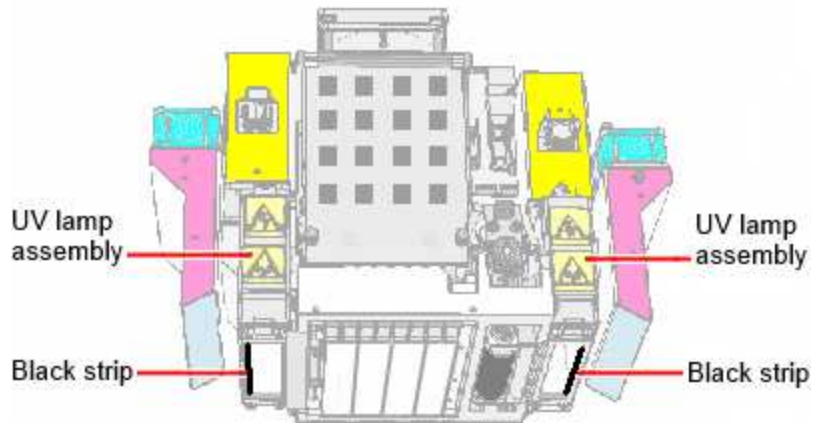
Print block and UV lamp assembly, showing correct placement of black strip
